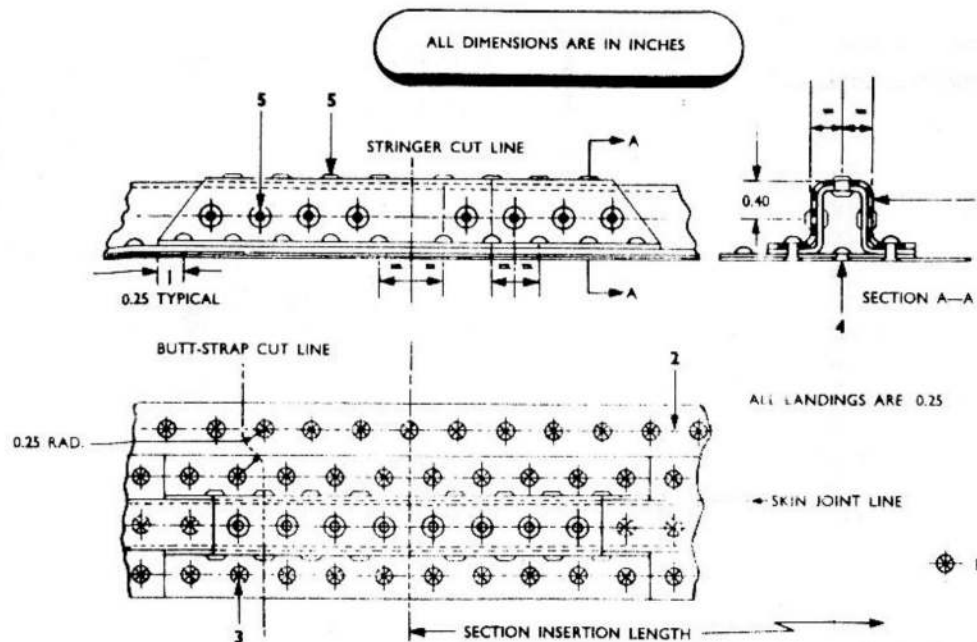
Insertion repair to skin joint butt-strap and channel-section stringer—front cowling
